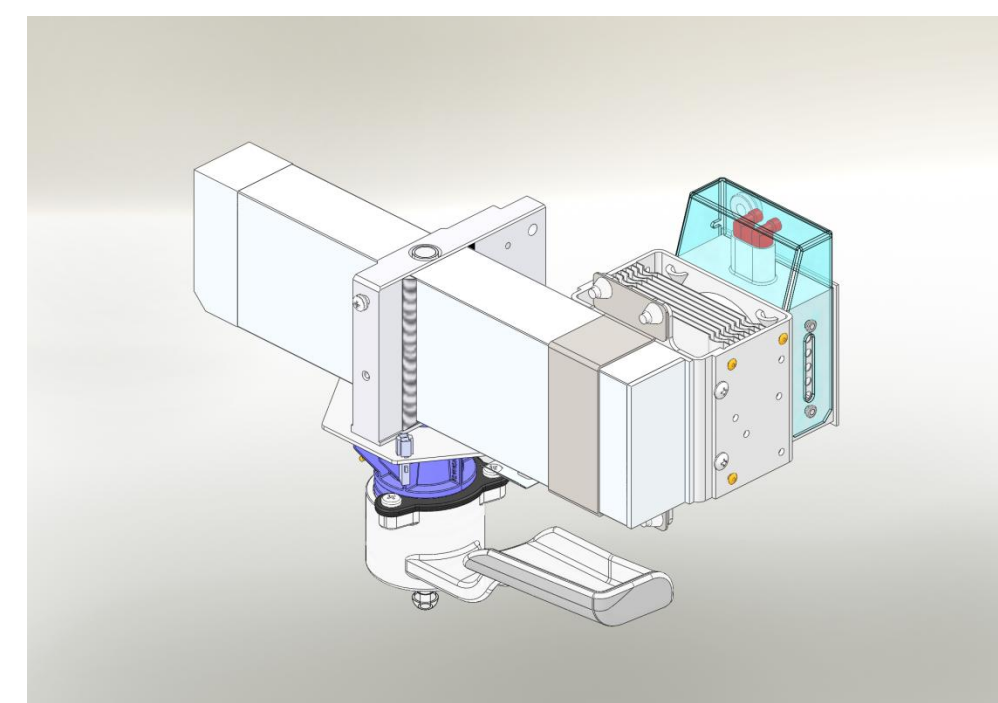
The magnetron, waveguide, torch loader and torch assembly used in the 4100 MP-AES.
